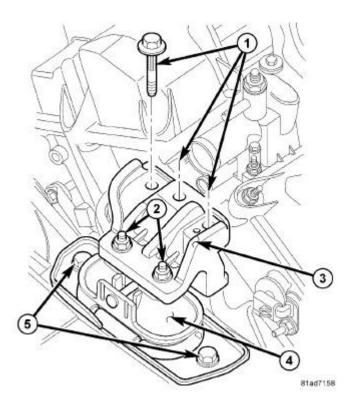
Removing/Installing Right Engine Mount (V6) Courtesy of CHRYSLER LLC
